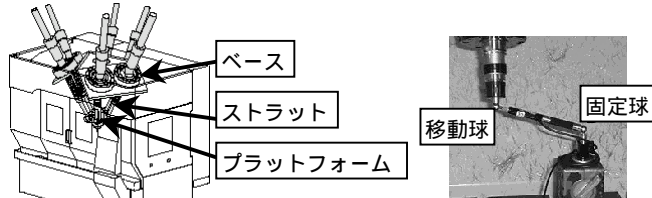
A Hexapod-type parallel mechanism machine tool, COSMO CENTER PM-600 by Okuma Corp.
